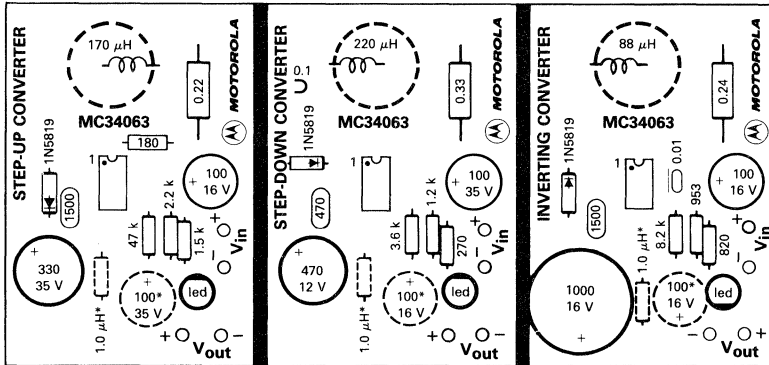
PRINTED CIRCUIT BOARD AND COMPONENT LAYOUT
